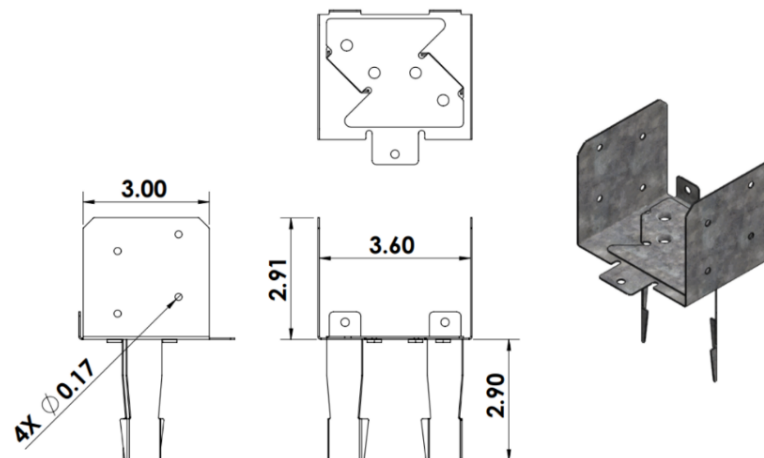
HercuWall® and HercuWall® HD Truss Saddle Bracket
